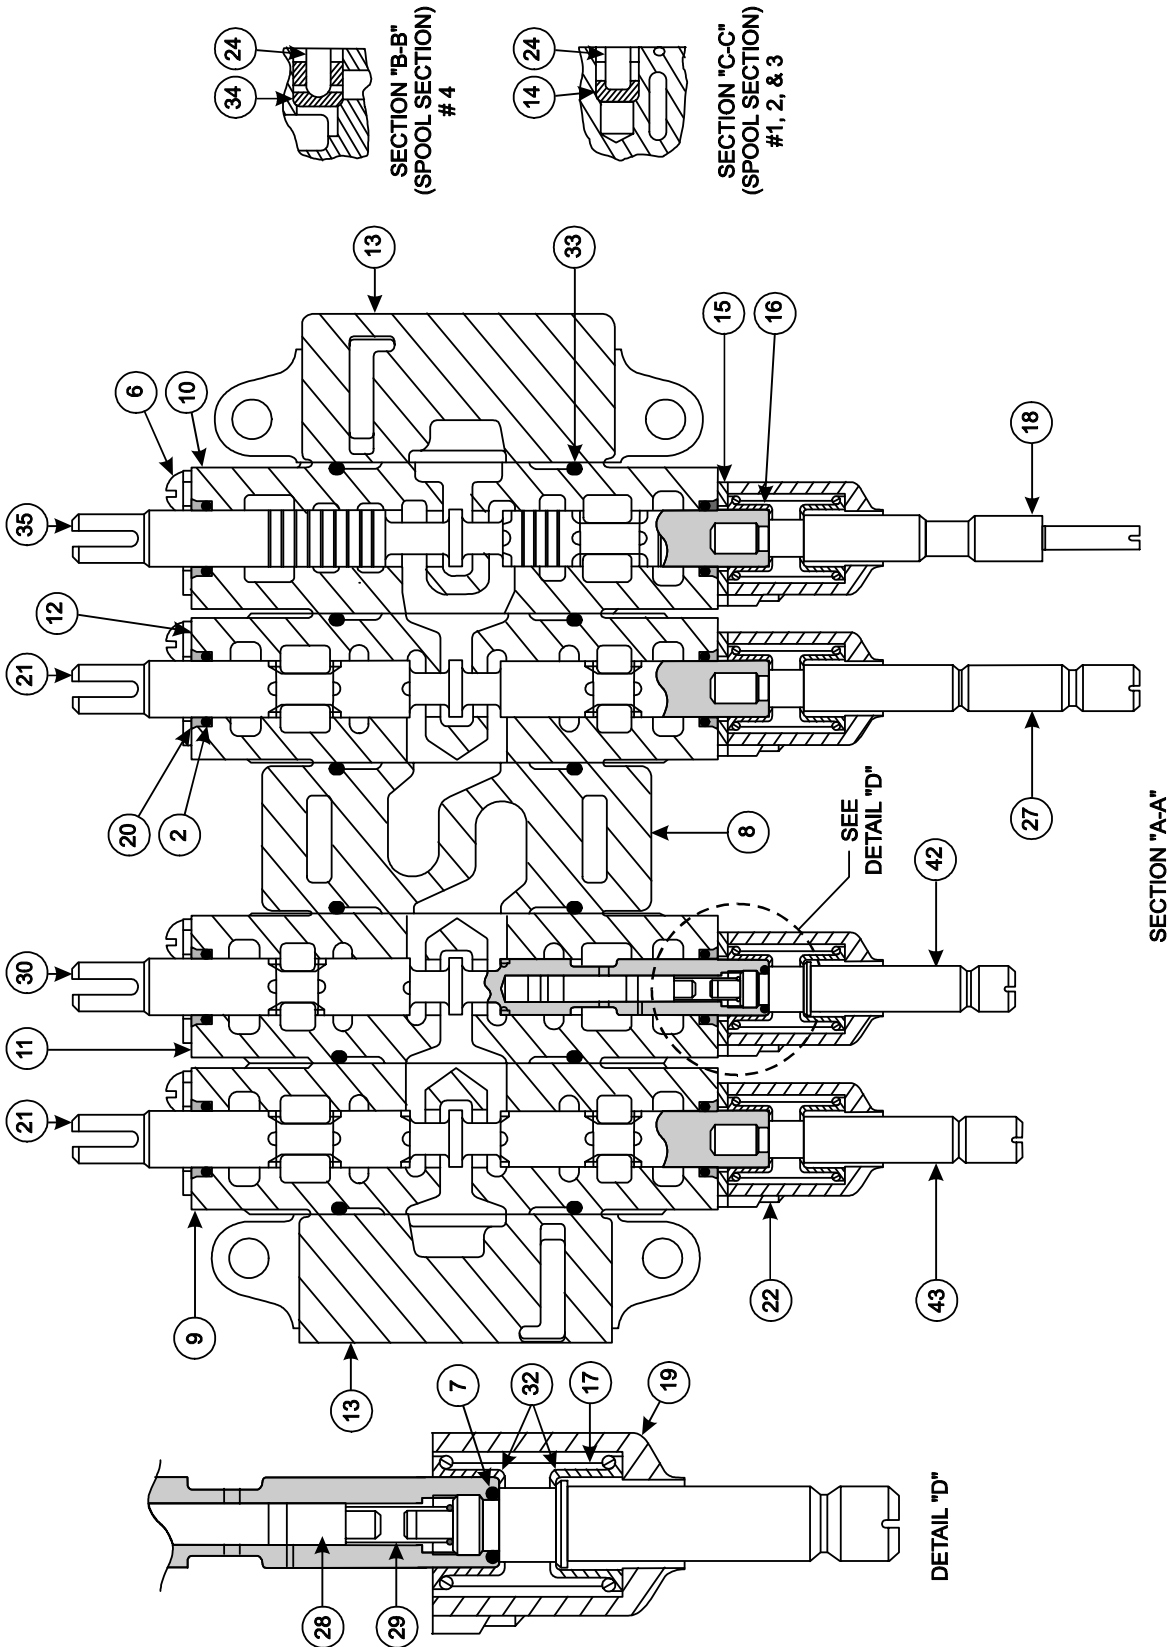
Control Valve Assembly Breakdown, p/n: 1413566-A (sheet 2 of 2)
